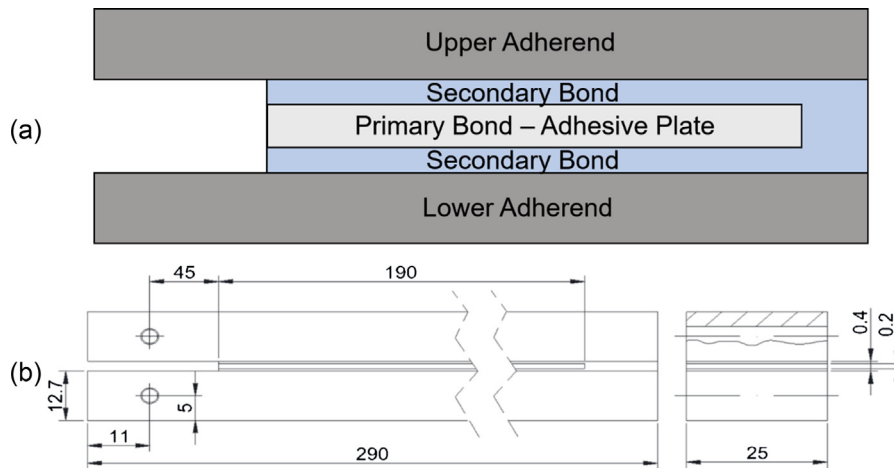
Scheme (a) and definition draw (b) of an ODCB specimen (dimensions in mm).
